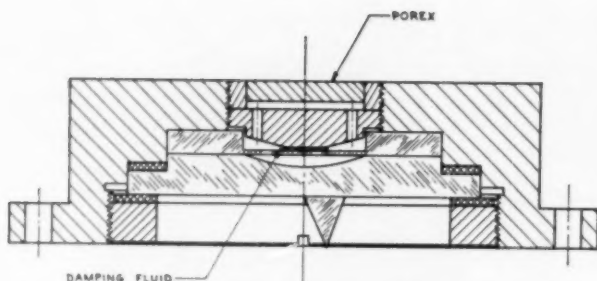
Drawing of quartz diaphragm and damping assembly.
